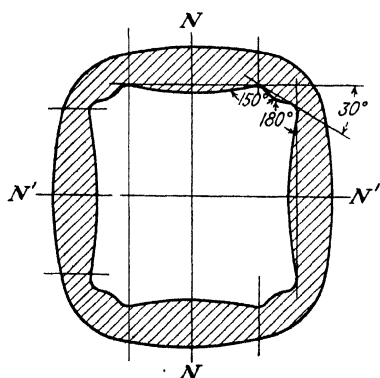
VII.—An example of a rectangular corrugated mold. (Courtesy of The Gathmann Engineering Co.)
